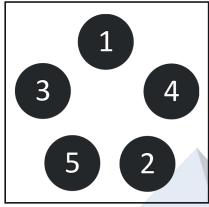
; Tighten the wheel bolts in the sequence shown in the diagram.
